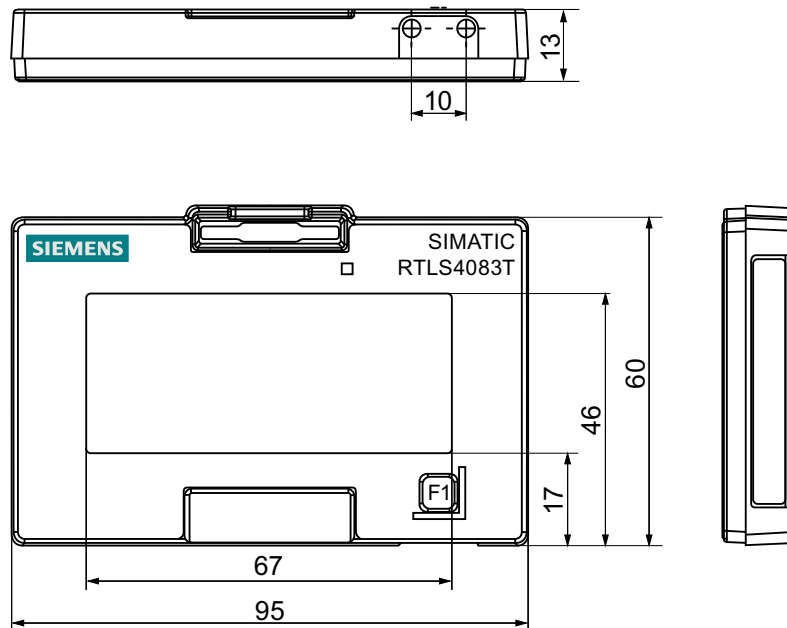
Dimension drawing SIMATIC RTLS4083T - All dimensions specified in millimeters
